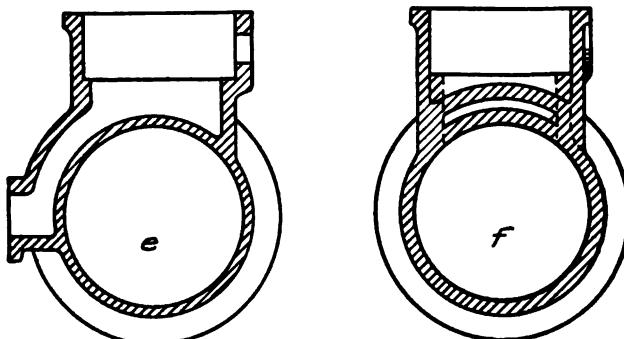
Sections through Slide Valve Cylinder at *AB* and *CD*, Fig. 244
